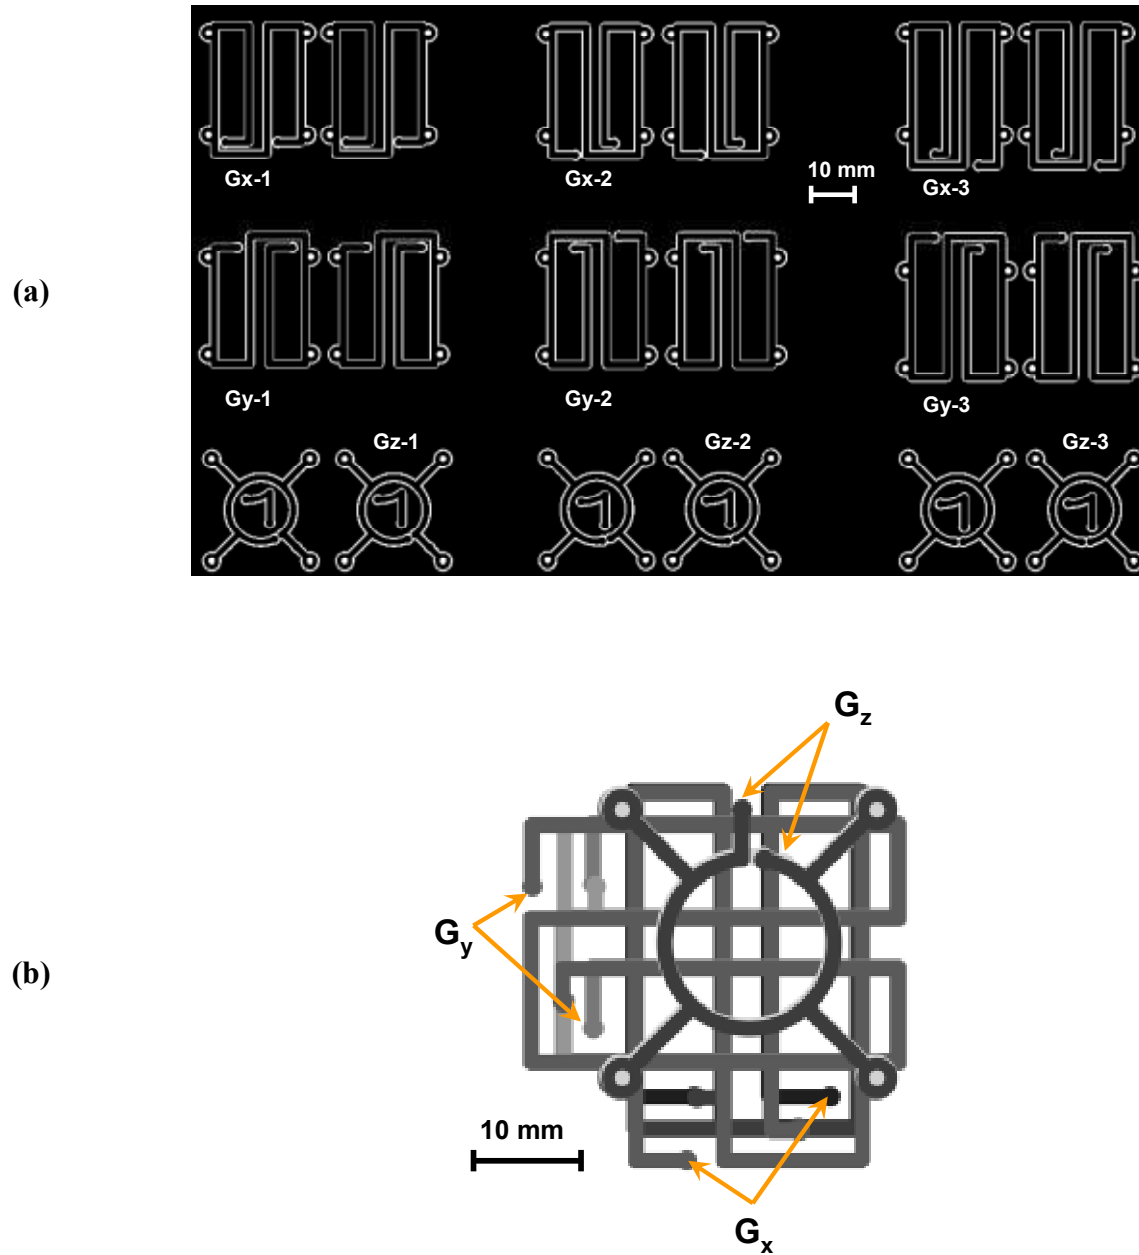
Mask (a) and the assembly (b) of the gradient coils.
